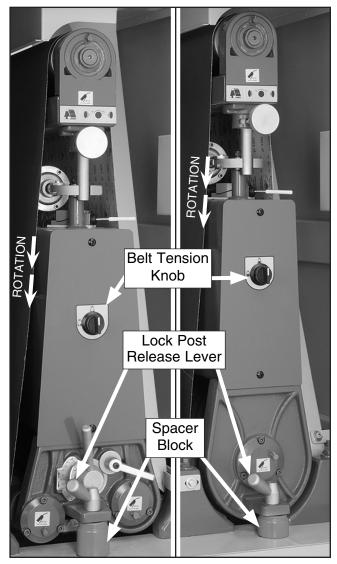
Components used when changing a sanding belt on single drum or platen-style wide belt sanders.
